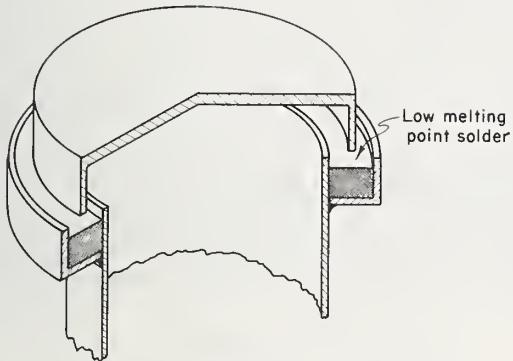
Flange and trough arrangement for using low melting point solder to make cryogenic vacuum seals.
